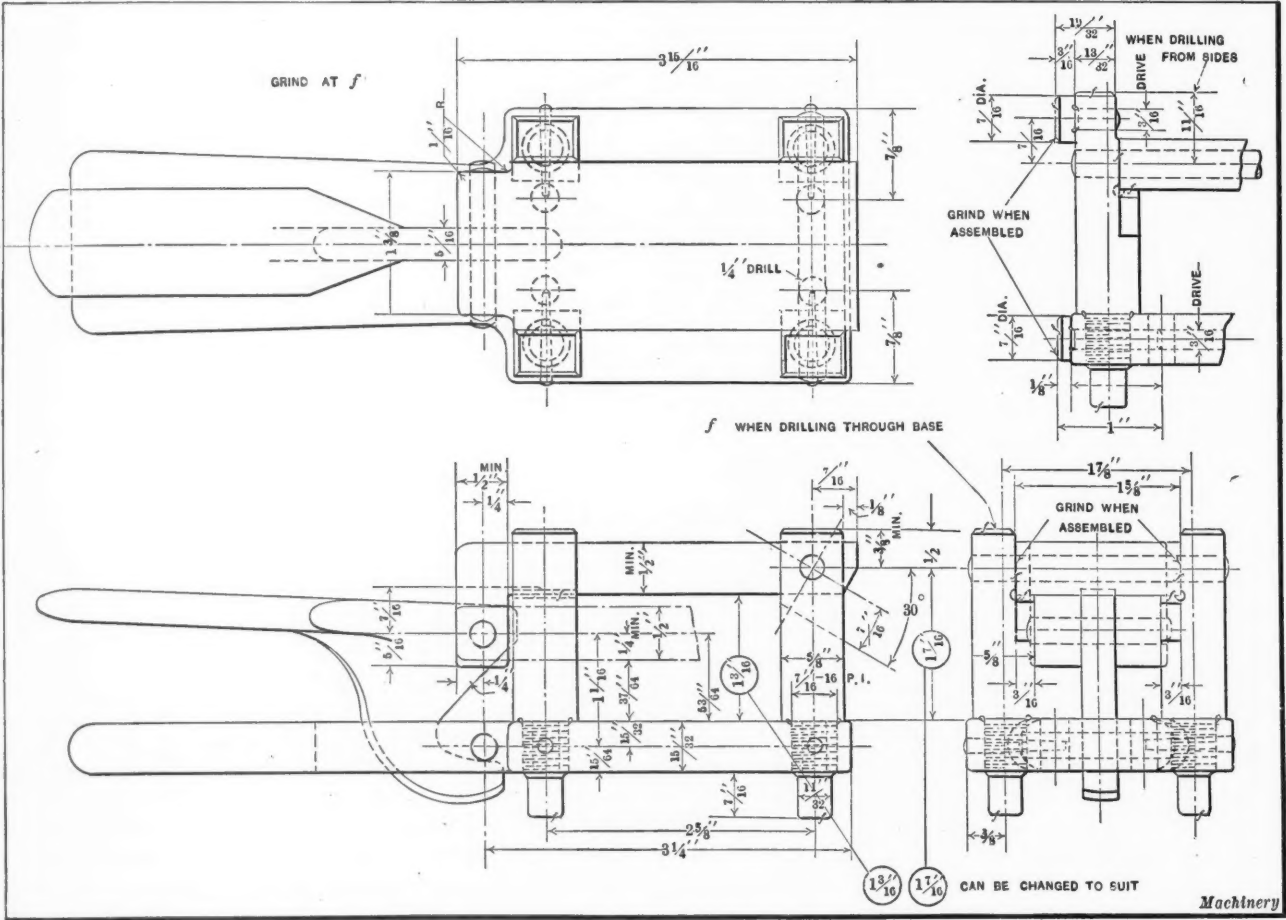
Drill Jig equipped with a Cam-handle and a Standard Base
